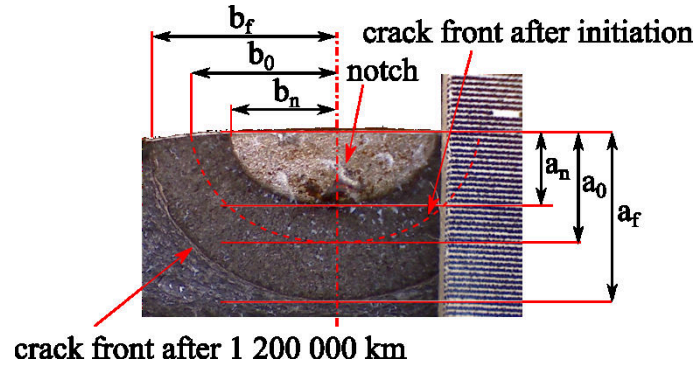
Fracture surface after the experiment. Important dimensions and crack front shape are marked
